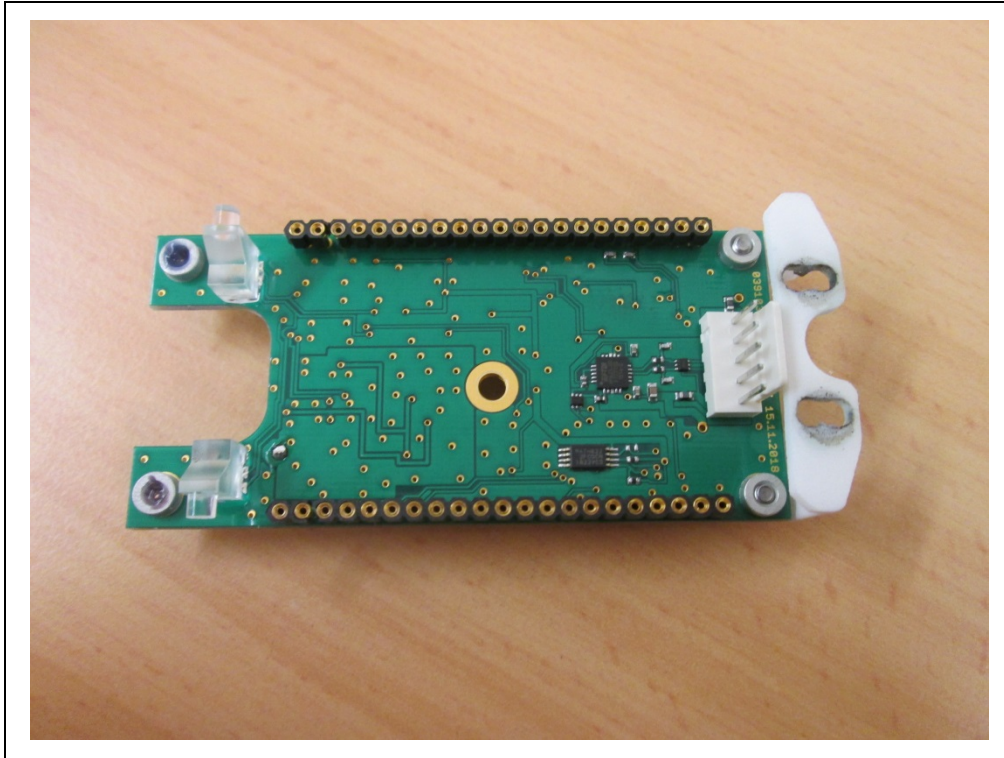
EUT#2 view of PCB 2 side 2
